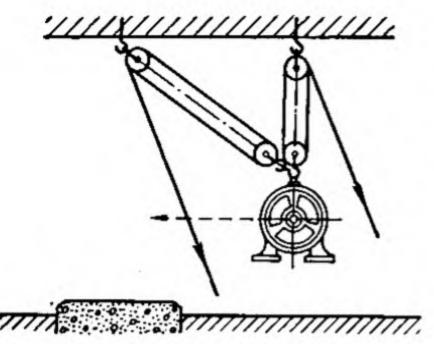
Motor being raised for mounting with the use of block and tackle.
